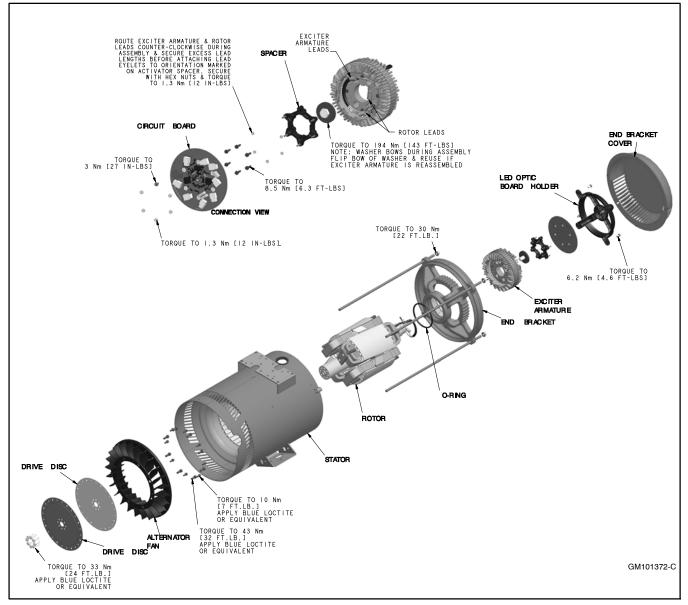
Alternator Assembly Torque Specs—40EKOZD/35EFKOZD Models (Parts Shown May Vary Slightly Between Models)
